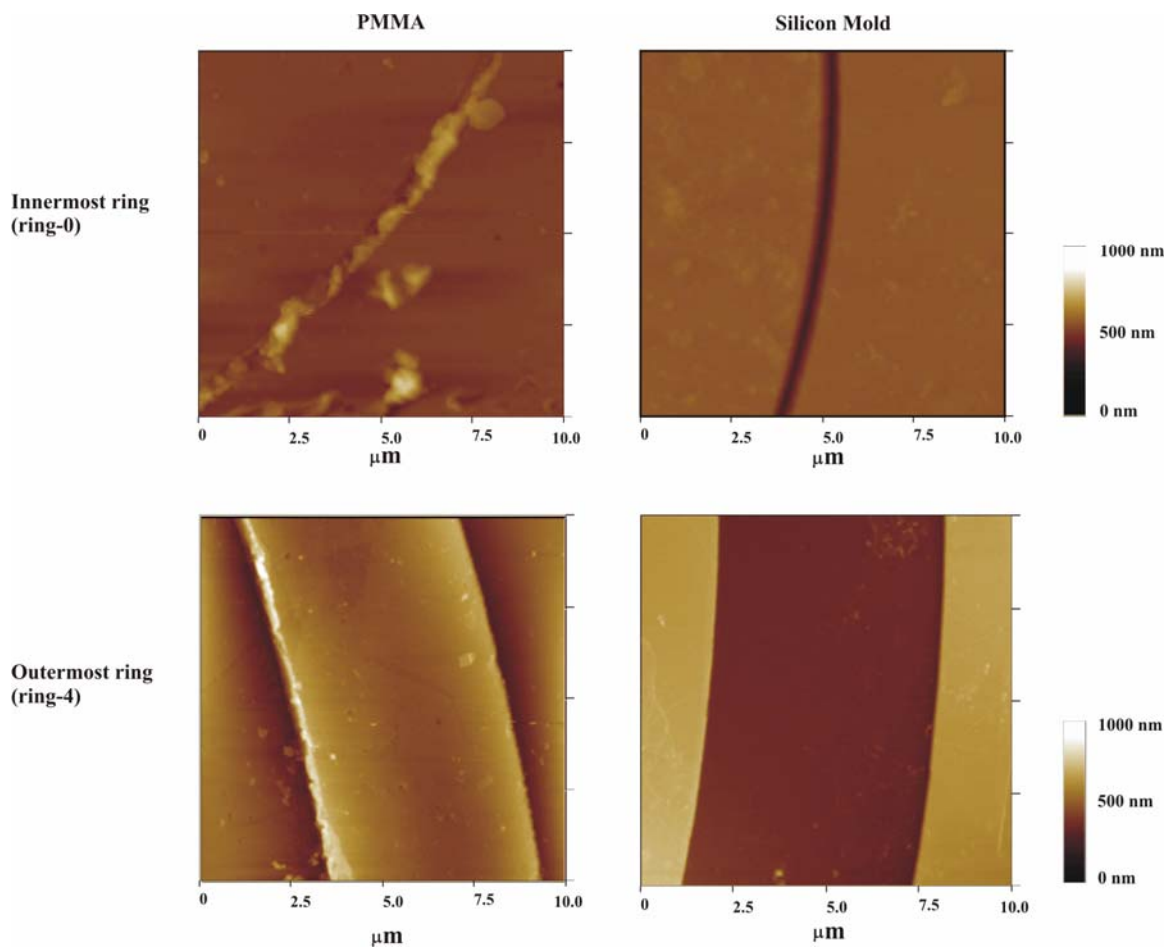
AFM topography of (a) PMMA molded part at location Ring 0 and Ring 1, and (b) silicon tooling surface before molding at location Ring 0 and Ring 4.
